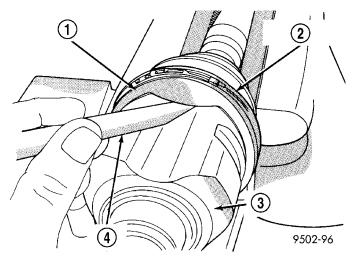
Trim Stick Inserted for Venting Tripod Joint
